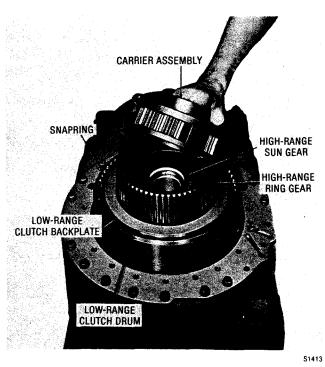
Removing high-range planetary carrier assembly (TRT 2221-1, 2421-1)
